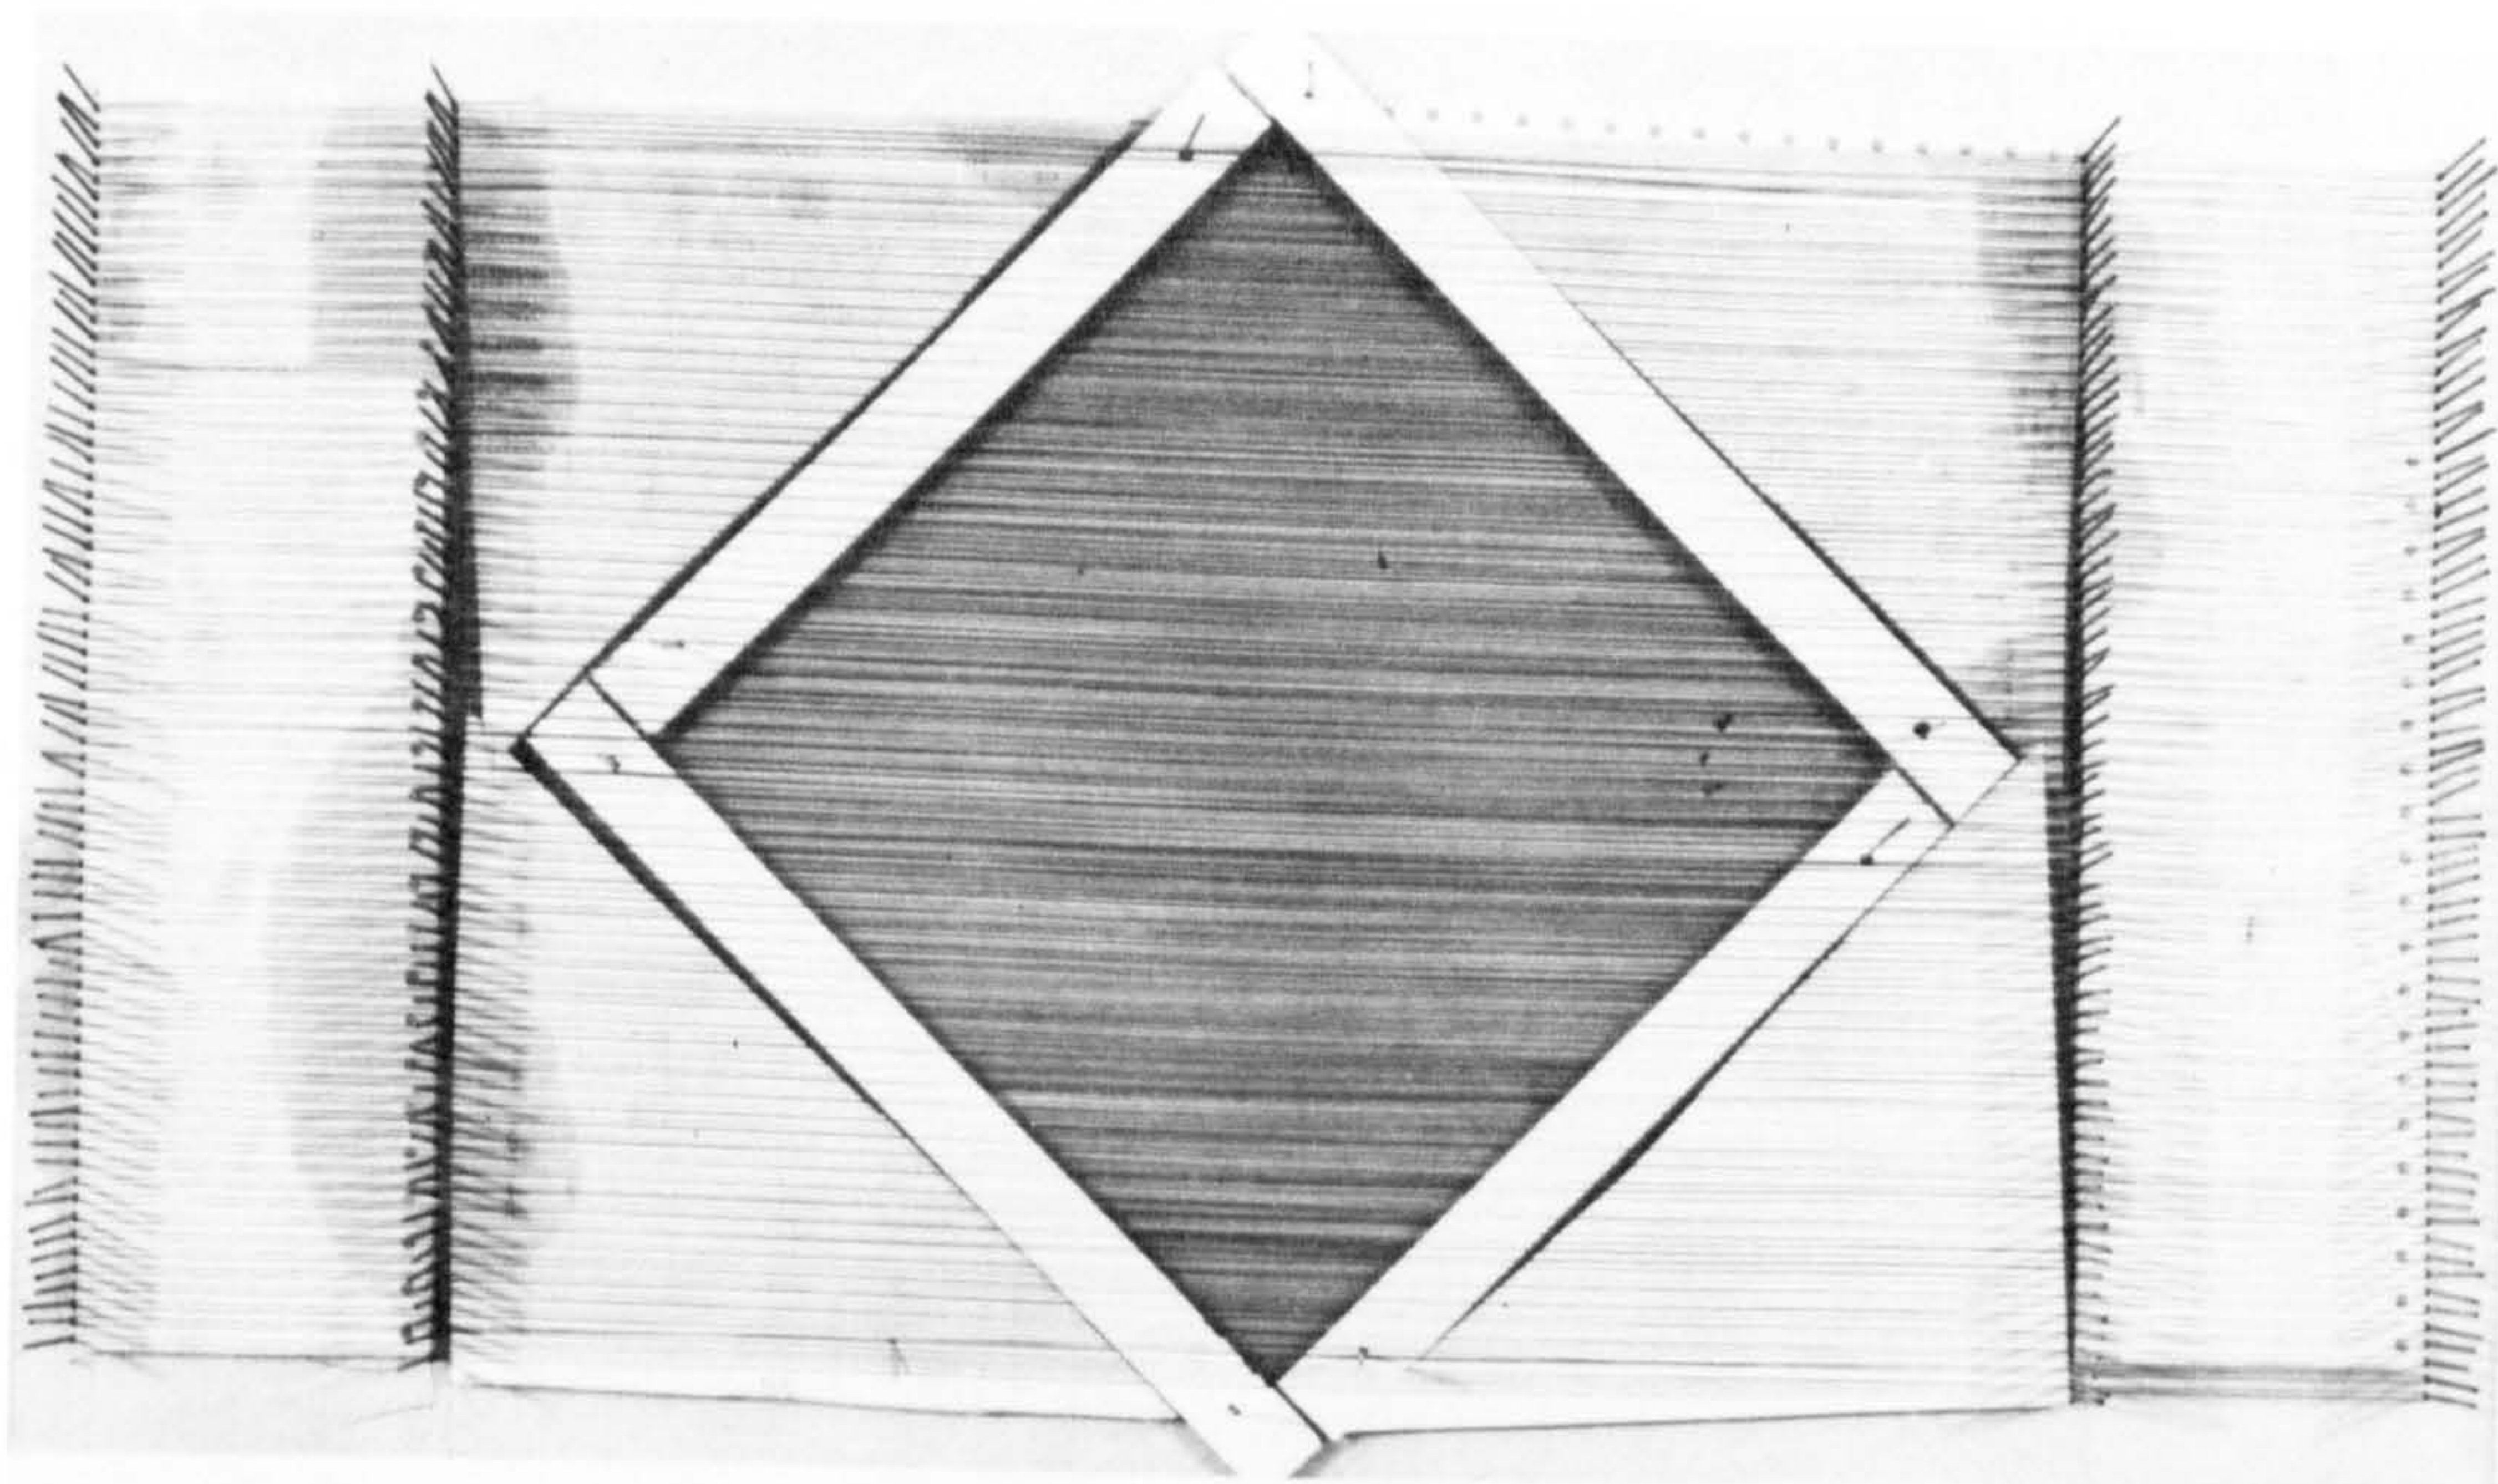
SHOWS SPECIMEN FABRICATION JIGS
